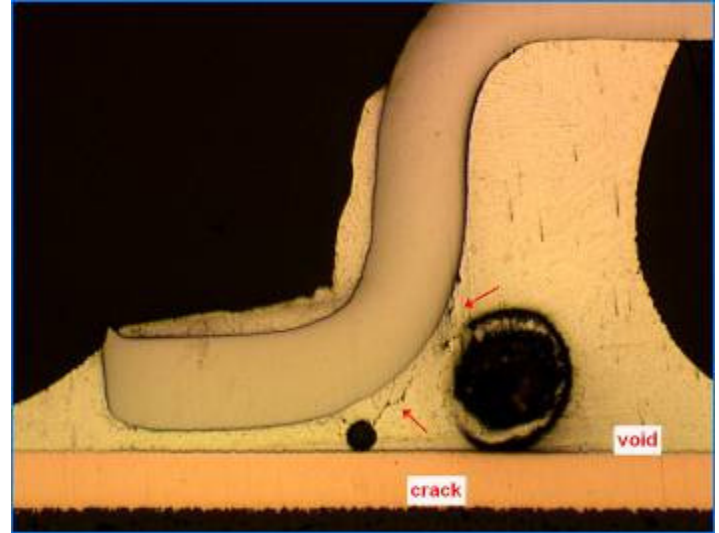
cross section, SN62, U61, left lead solder crack and voids, 100x
